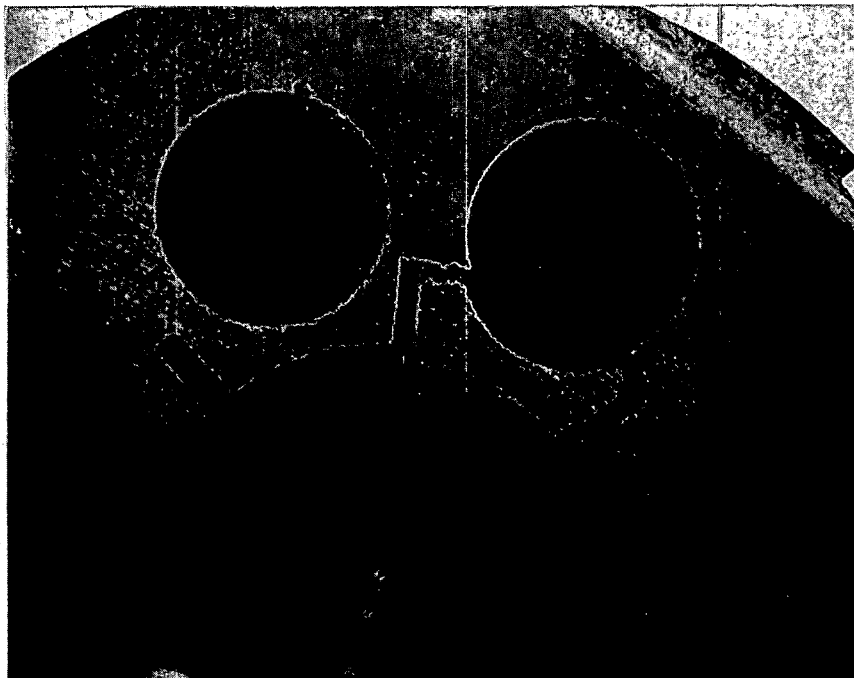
Transverse section showing "fail-safe" cracks in hole 5 of FTE-2 fuel body 2 at 6 in. from bottom
